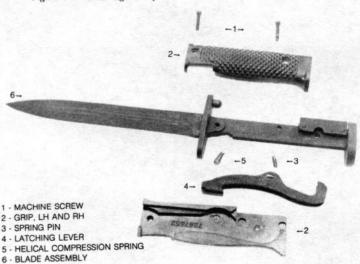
Bayonet knife, M 5A1 - exploded view. NOTE: Bayonet knife M 5 differs internally, only, in position of helical spring.
